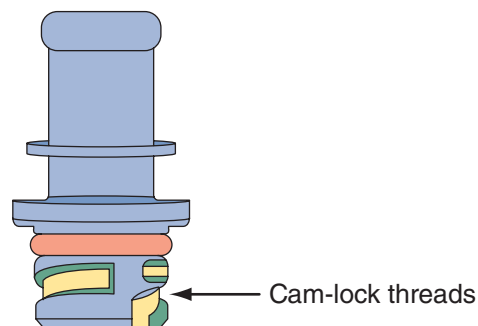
A PCV valve with cam-lock threads that prevent it from accidentally becoming loose.
